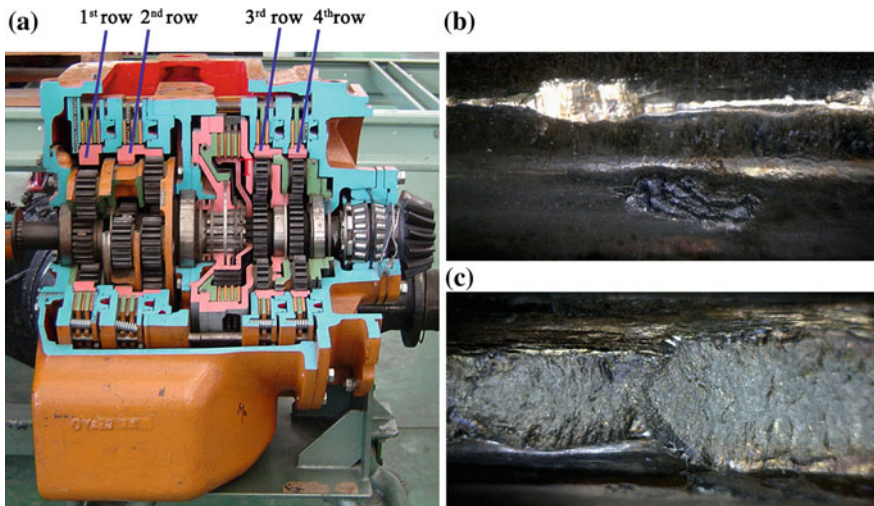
a SD16 planetary gearbox. b Pitted sun gear  $s_2$ . c Sun gear  $s_2$  with broken tooth
